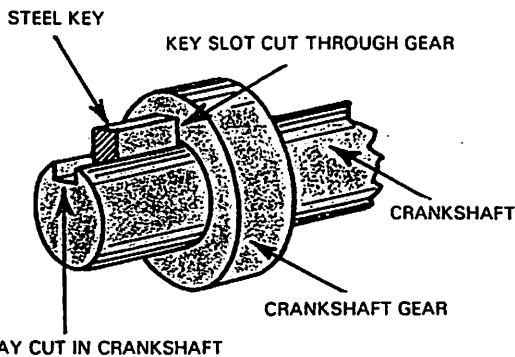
A steel key, sliding in a slot in the crankshaft, passes through a similar slot in the gear to secure the gear to the shaft.
